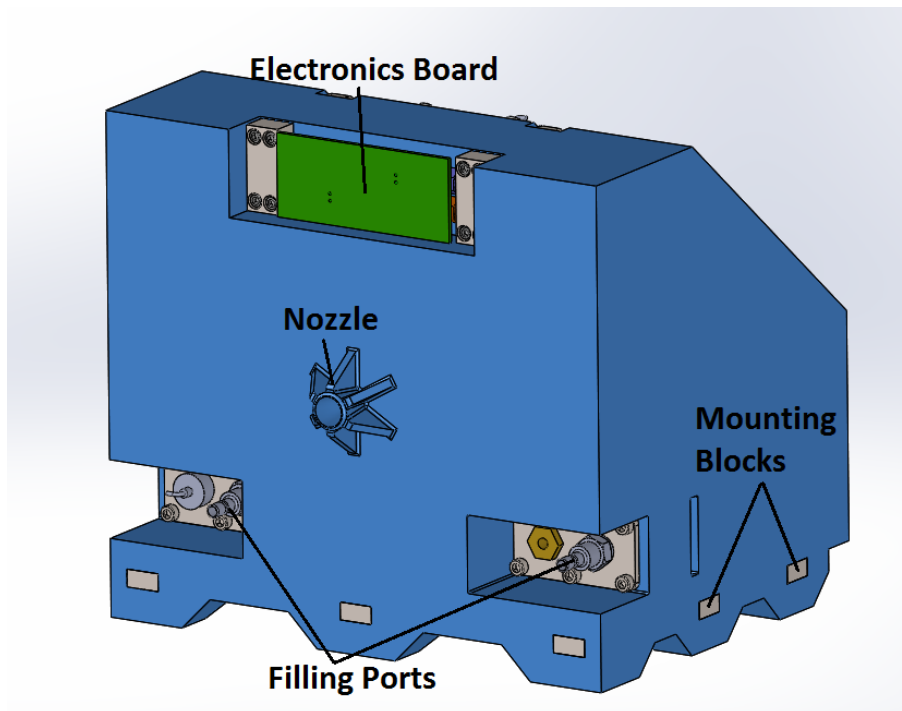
Outer view of the Prox-1 thruster, showing four of the manifolds, the filling ports, the mounting blocks, the electronics board, and the nozzle.
